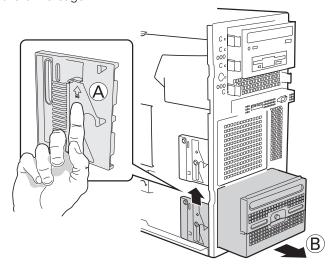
Removing Six-drive Fixed Drive Cage from Chassis
